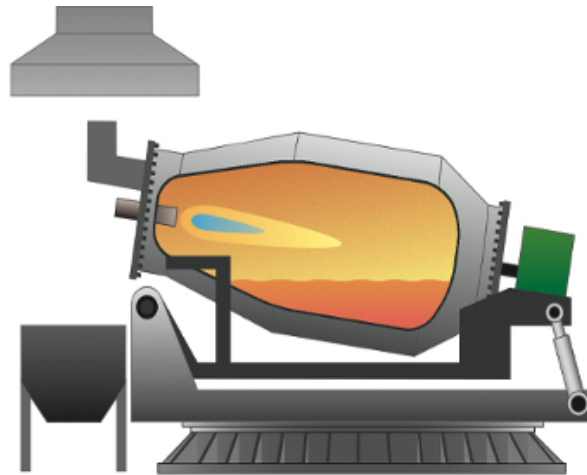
Schematic drawing of a typical rotary furnace [24]
